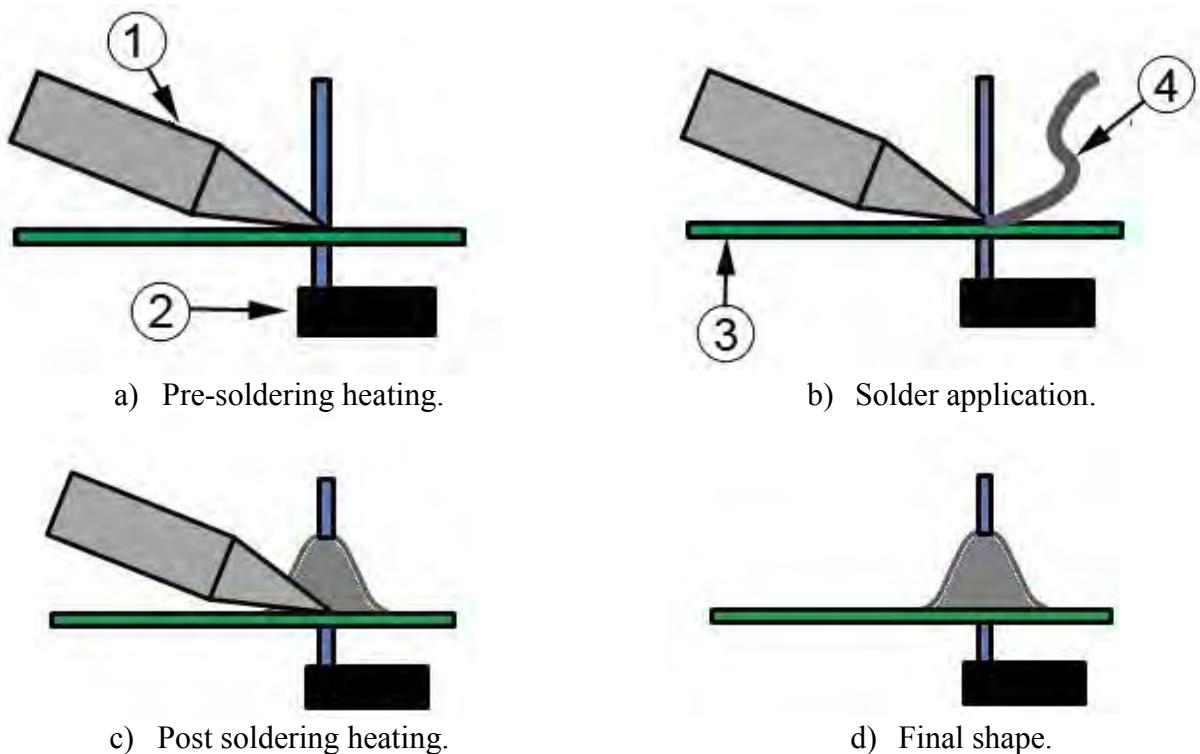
Sequence of soldering. (1) Soldering iron, (2) Electronic part, (3) PCB, and (4) Solder.
